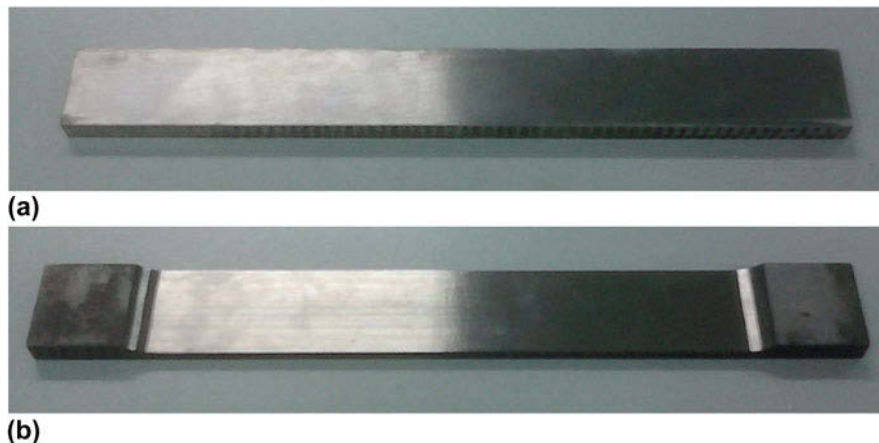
(a) The workpiece before machining. (b) The workpiece after machining.
